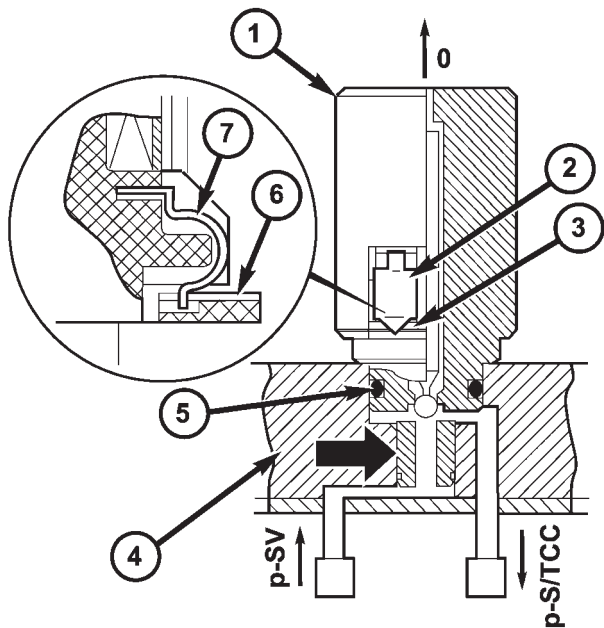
Torque Converter Lockup Clutch PWM Solenoid Valve
